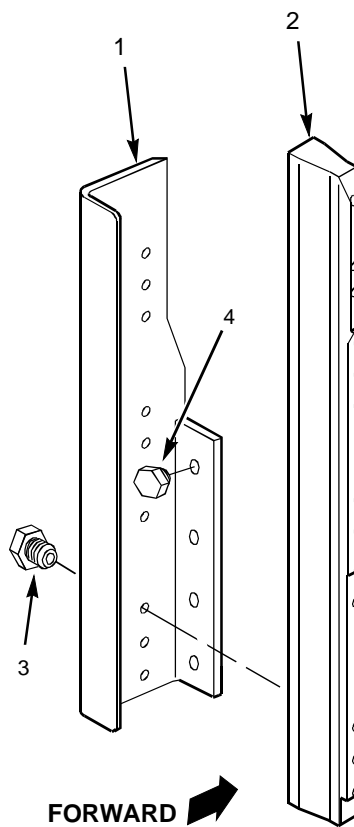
Right A-Pillar Reinforcement Installation (2 and 4 Door)
